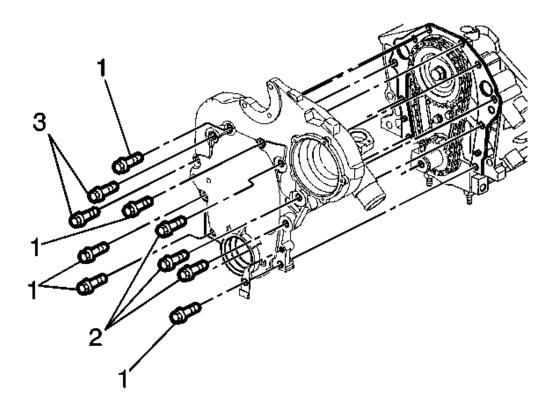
Removing/Installing Engine Front Cover Courtesy of GENERAL MOTORS CORP.
